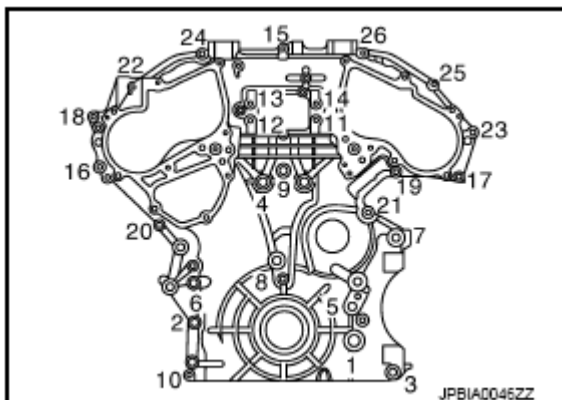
Identifying Front Timing Chain Case Mounting Bolts Loosening Sequence
